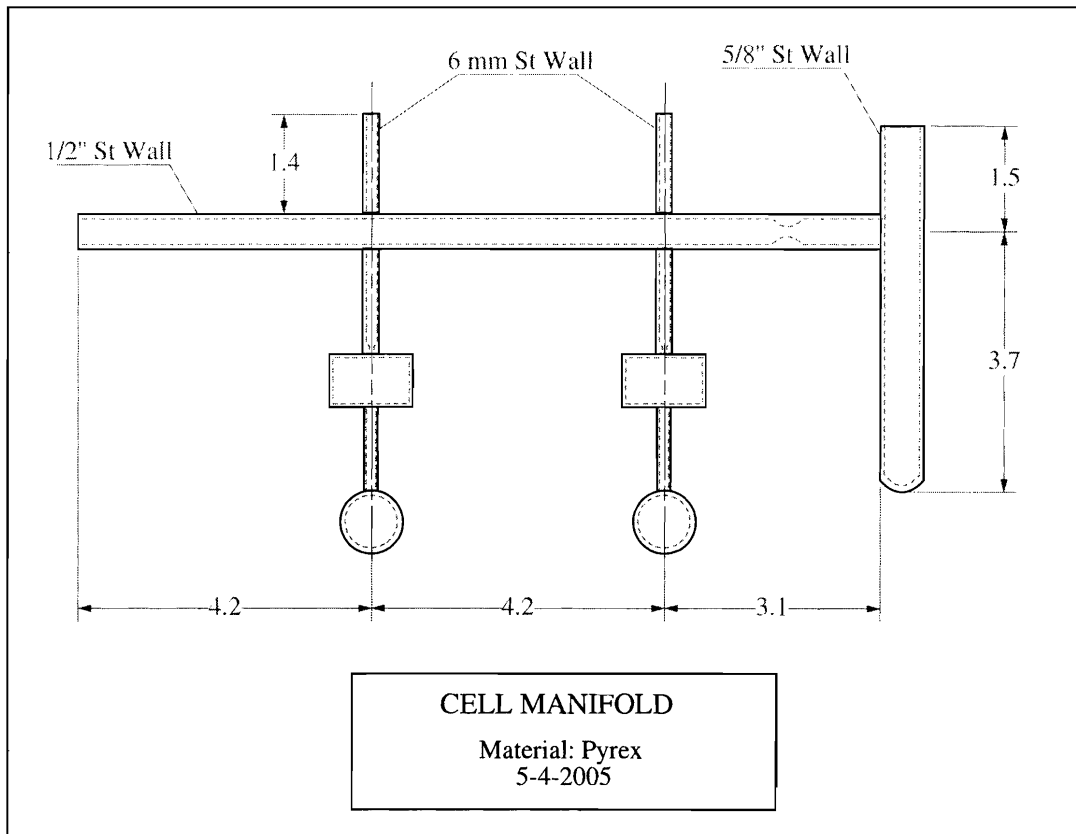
Typical glass manifold used to make two maser cells. All dimensions are in inches unless otherwise specified.
